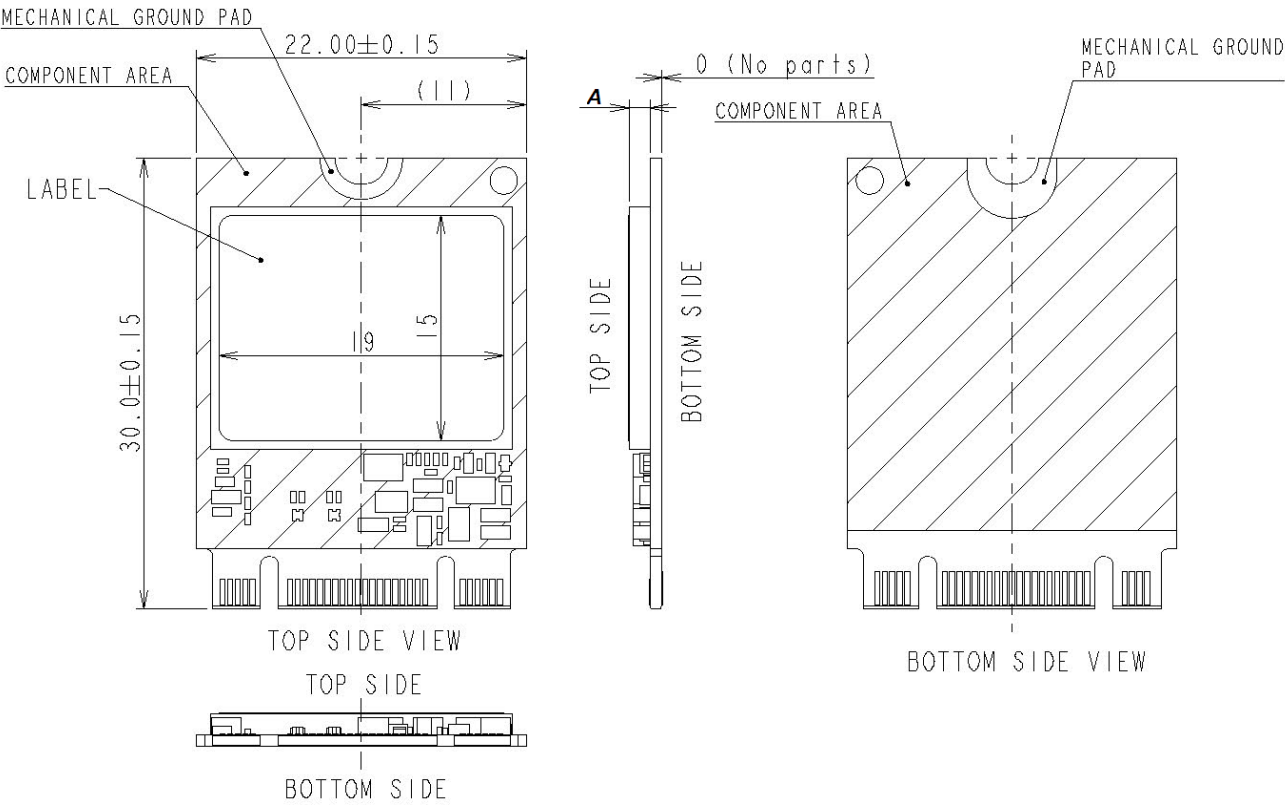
Dimensions of KBG3xZPZxxxx (Single Package)
